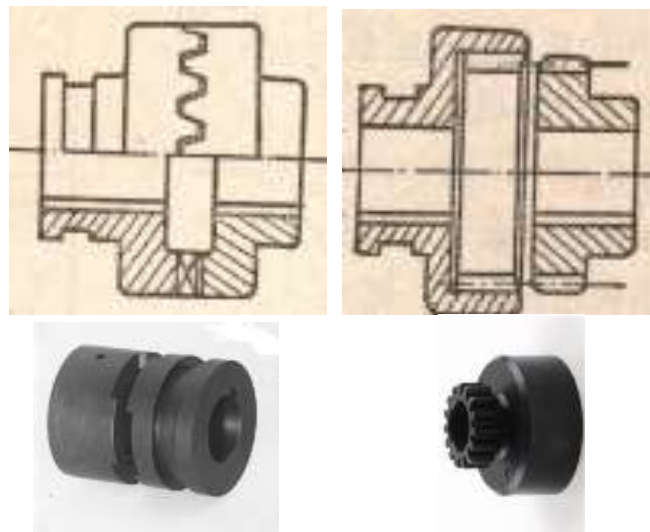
Simple toothed clutches. Top left: surface tooth meshing, top right: internal tooth meshing. The bottom photos are examples from internet.
